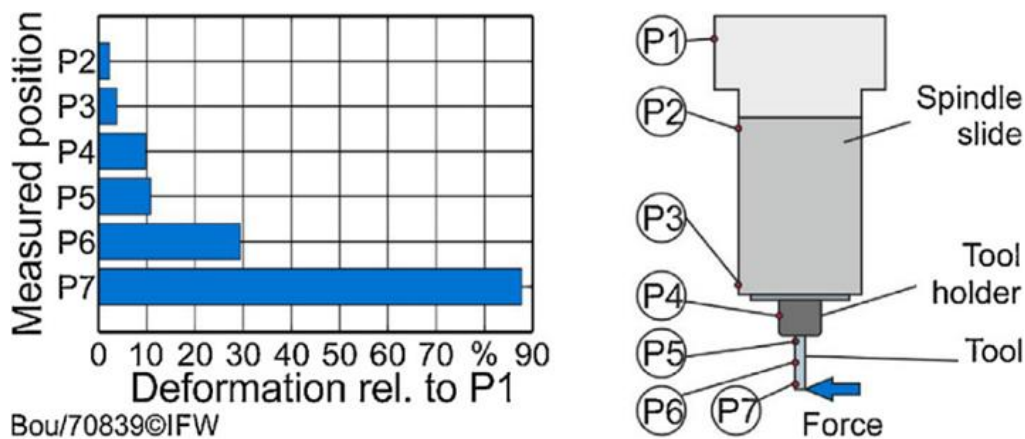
Deformation of spindle head by applying force in tool center point [3].
